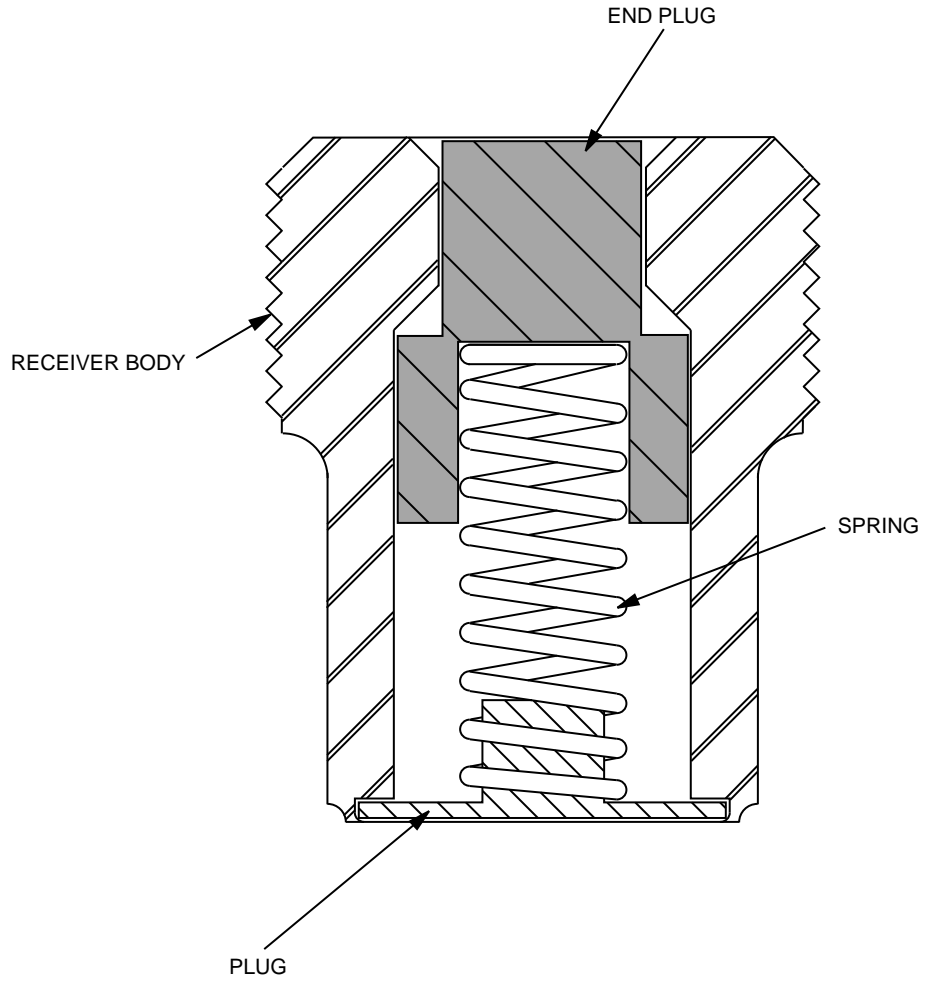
Platform Interlock Fitting Hull Receiver
